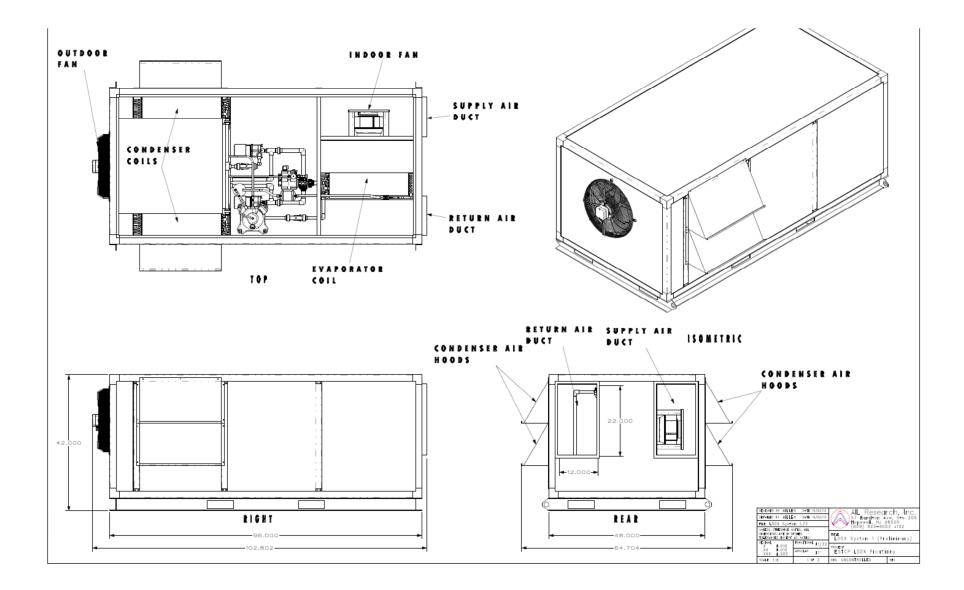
Engineering Drawing of the LDDX-WF Prototype
